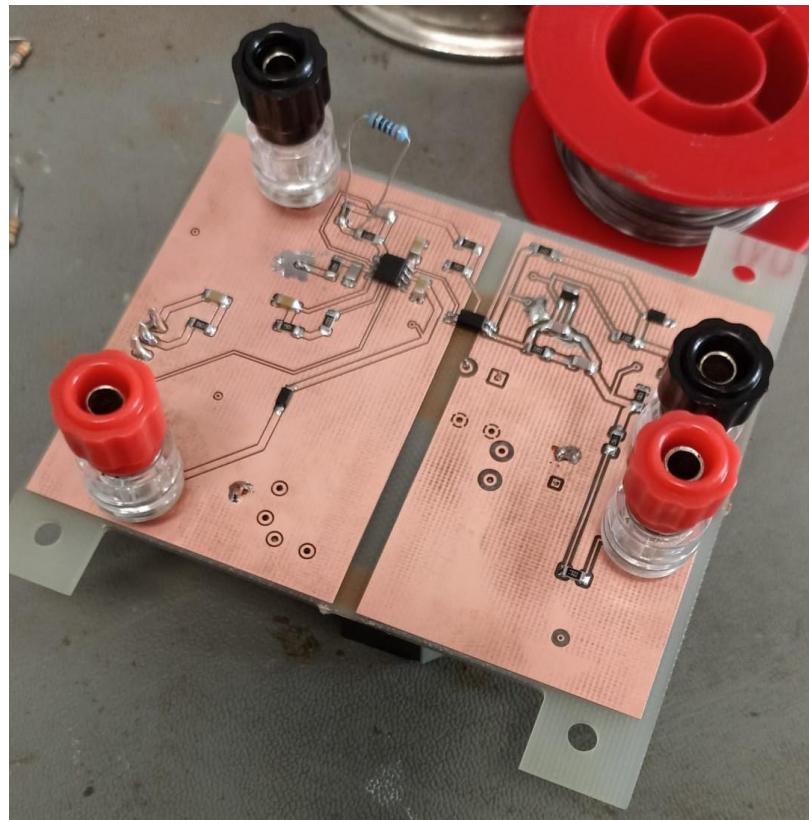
Real view of the PCB: Front Layer (Open Loop)
